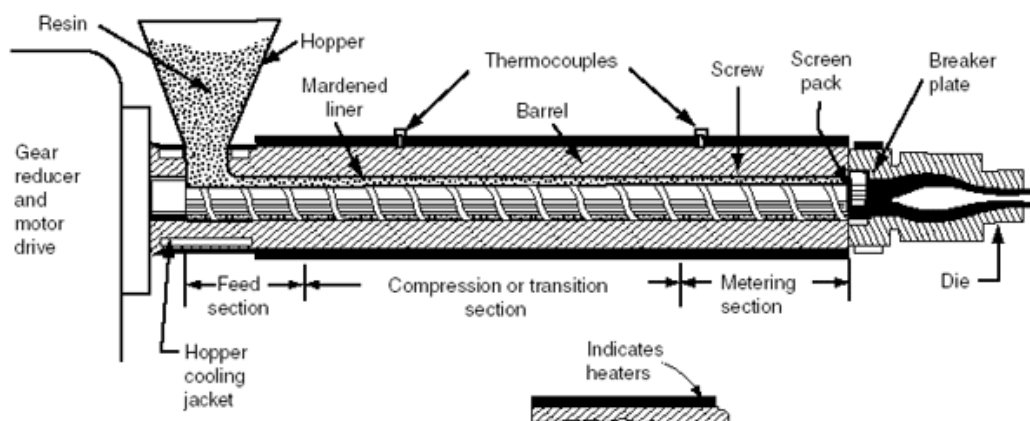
Scheme for a typical single-screw extruder showing extruding pipe.
